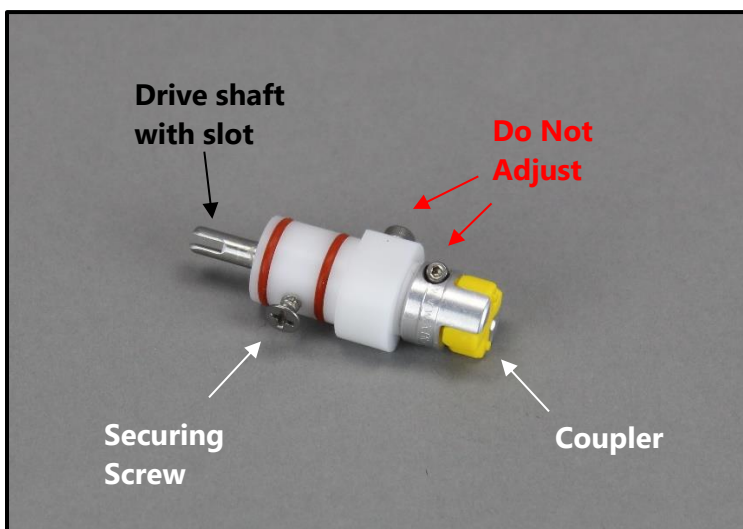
Replacement of Bubble Paddle (VP 759AL). Sealed bearing shown with coupler and drive shaft pulled out of bearing no more than ~4mm.
